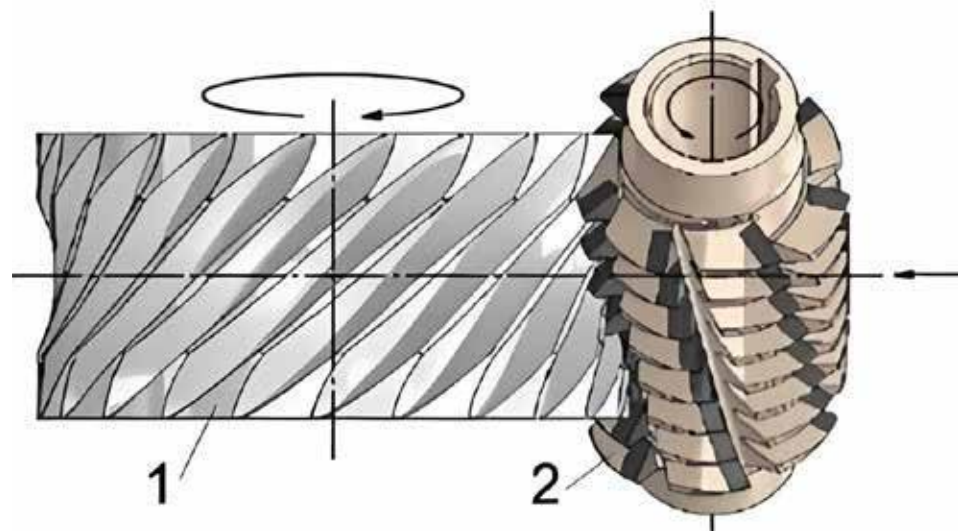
Enveloping helical gear hobbing; 1 – enveloping helical gear blank, 2 – gear hob.
